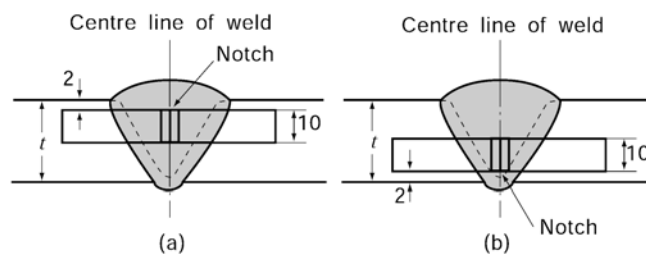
Butt Weld Test Assembly with One-run and Multi-run Technique (Unit : mm,  $t$  = Plate thickness)
